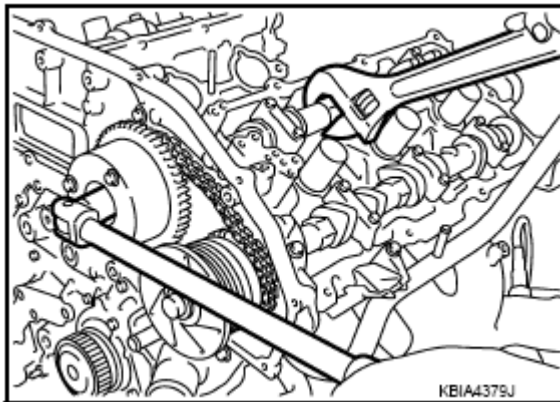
Removing Camshaft Sprocket Bolts Using Tool
